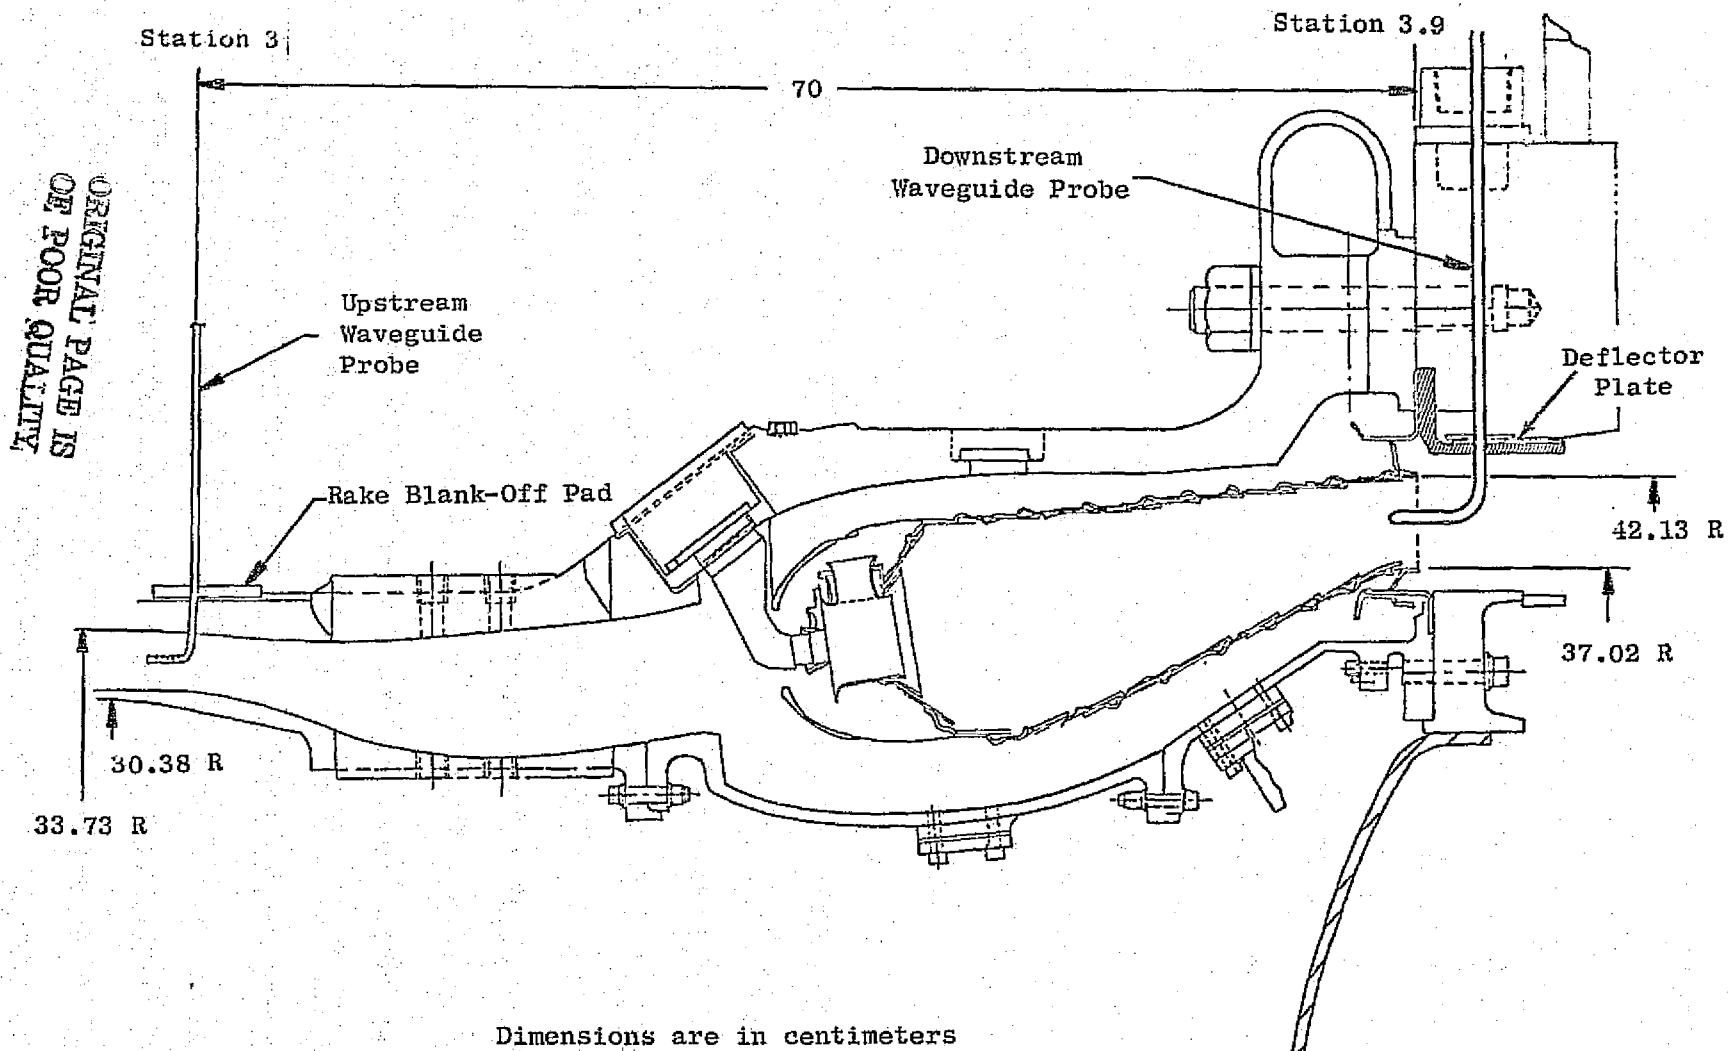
Top-Half Cross Section of Experimental Clean Combustor Test Rig Showing the Acoustic Probe Locations.
